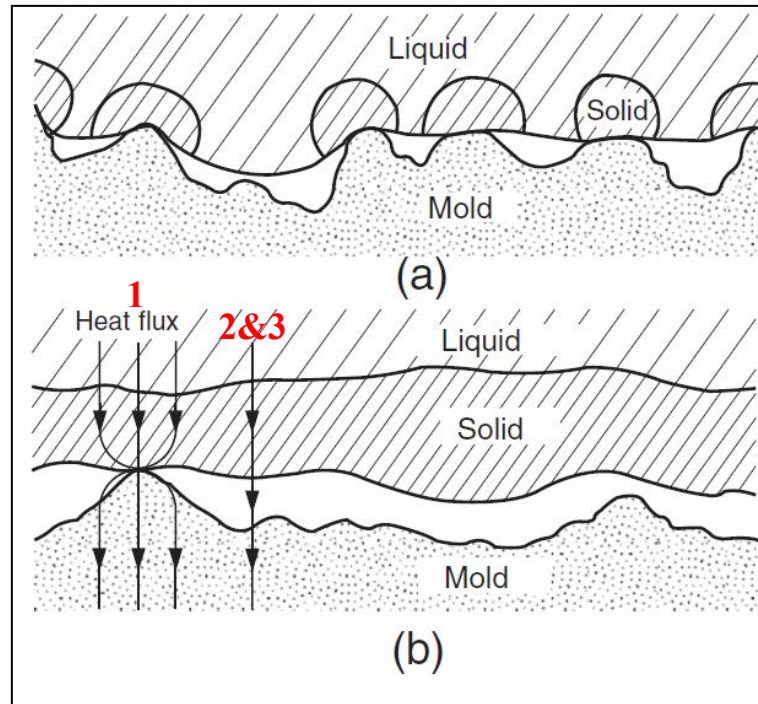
Metal–mould interface at an early stage when solid is nucleating at points of good thermal contact. Overall macroscopic contact is good at this stage (a). Later (b) the casting gains strength, and casting and mould both deform, reducing contact to isolated points at greater separations on non-conforming rigid surfaces (Campbell, 2011b).
